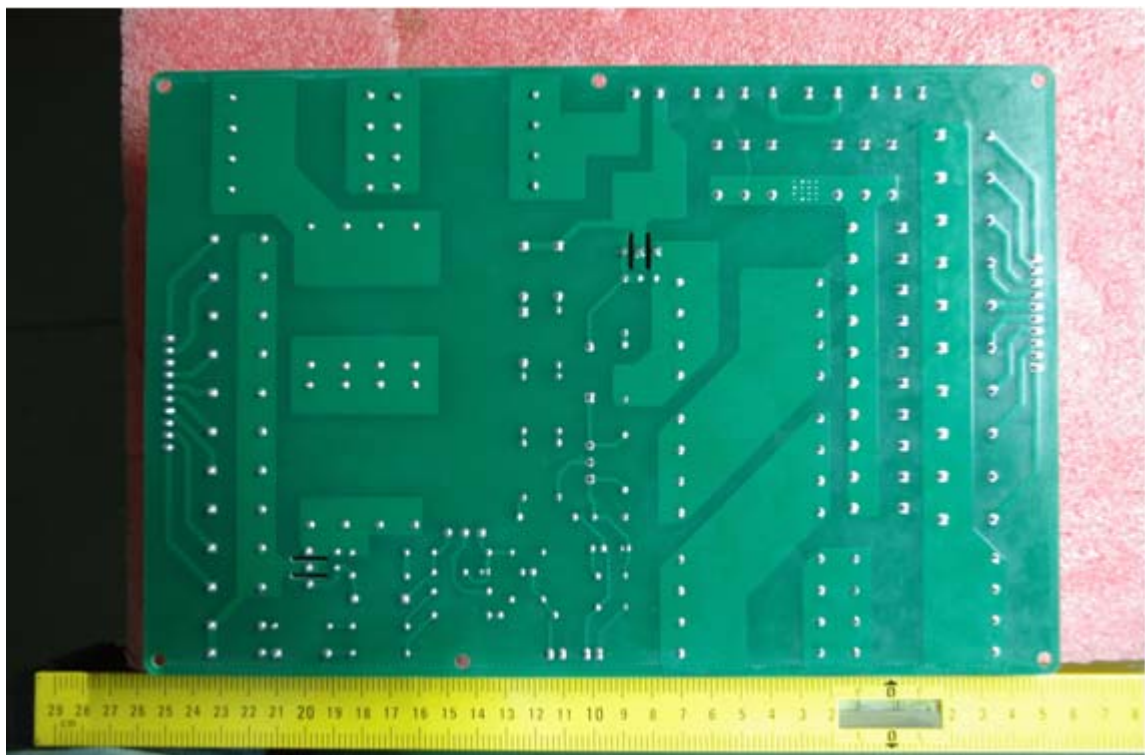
Board SNT_PCB_3320_QD, traces side view
